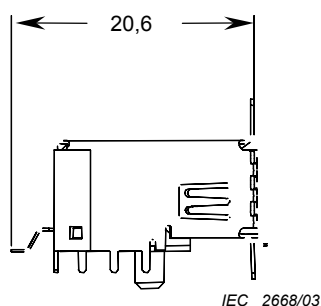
Side view fixed board connector (XB) right angle (version 2)
